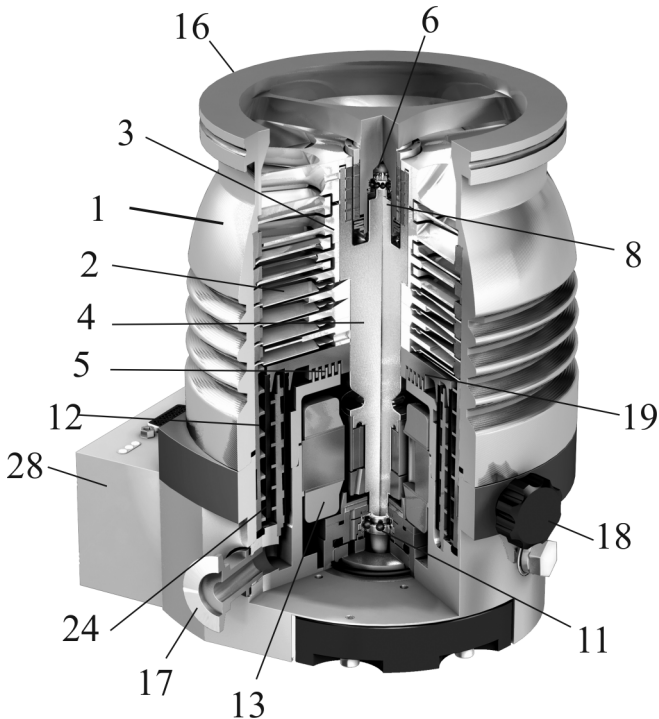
Turbomolecular pump with rotor disks shrunk onto the shaft. Bearings at both ends (UHV compatible permanent-magnet bearing on the inlet side and oil-lubricated bearing on the fore-vacuum side) provide favorable dynamic behavior of the rotor. 1: housing; 2: stator; 3: rotor; 4: rotor shaft; 5: labyrinth seal; 6: safety bearing; 8: radial magnetic bearing; 11: lower ball bearing; 12: *Holweck* stators; 13: motor; 16: suction flange; 17: fore-vacuum port; 18: vent valve; 19: *Holweck* hub; 24: *Holweck* sleeves; 28: electronic drive unit.
